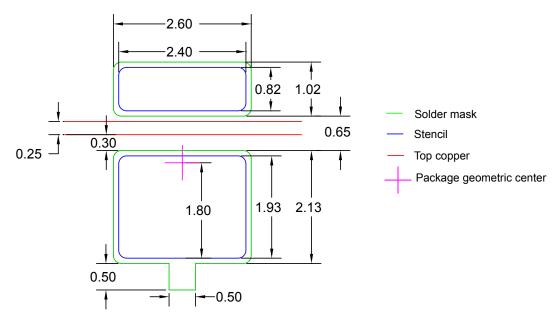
Recommended PCB solder pad layout for LUXEON 3535L Color Line of LEDs.
